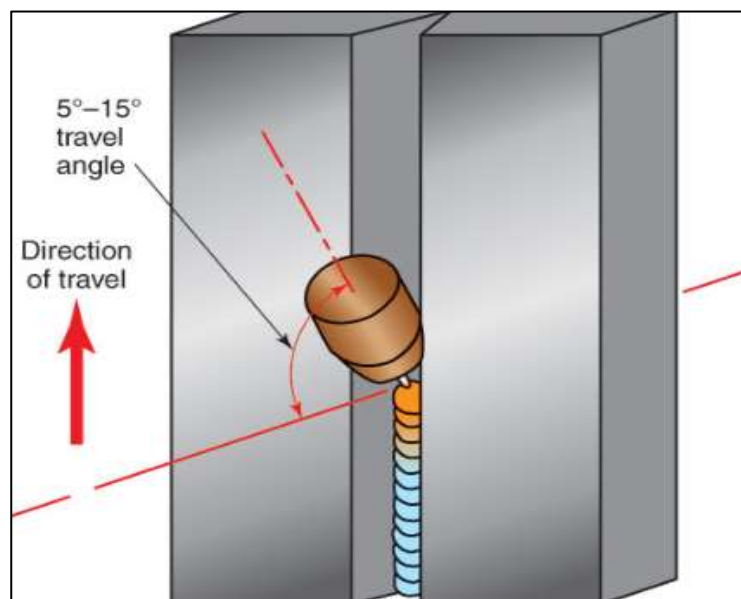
Vertical Welding Position (Chen et al., 2013)
